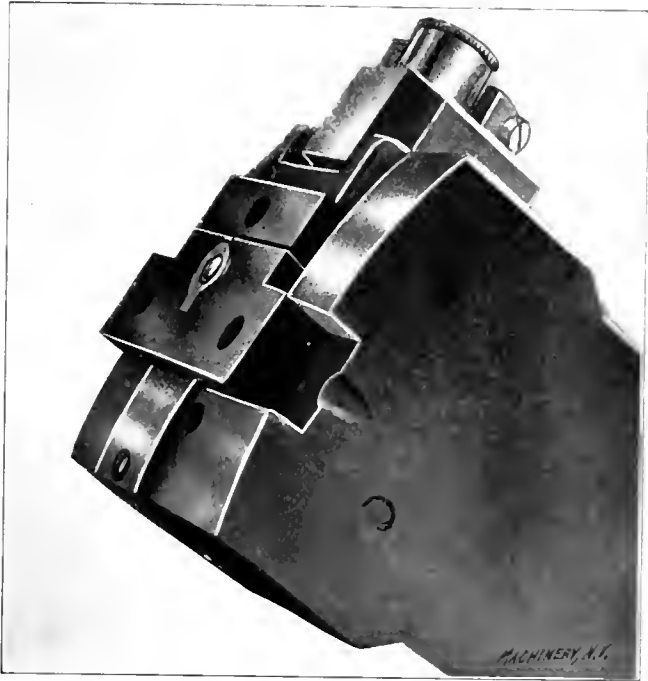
One Head of Rolling Device, showing Construction of Work Holder.
